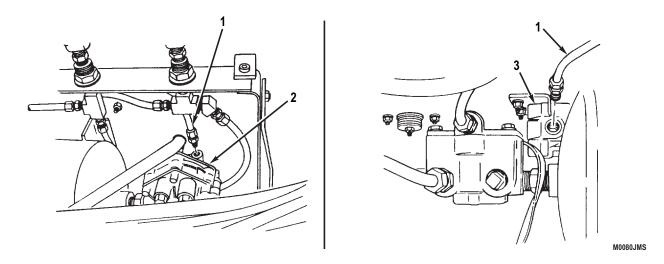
Full Function Valve-to-Relay Valve Tube Assembly Replacement.
